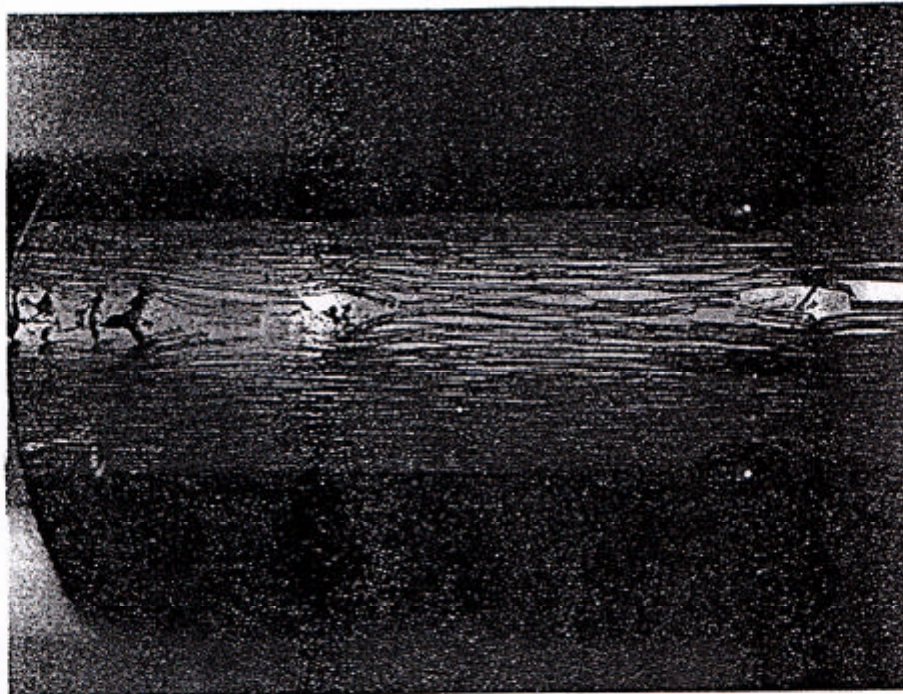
SUB-ARC WELDED - 4.55 MM
